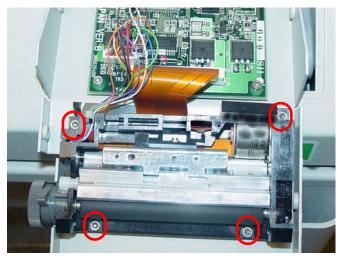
Remove the Screws that Secure the Lower Assembly
